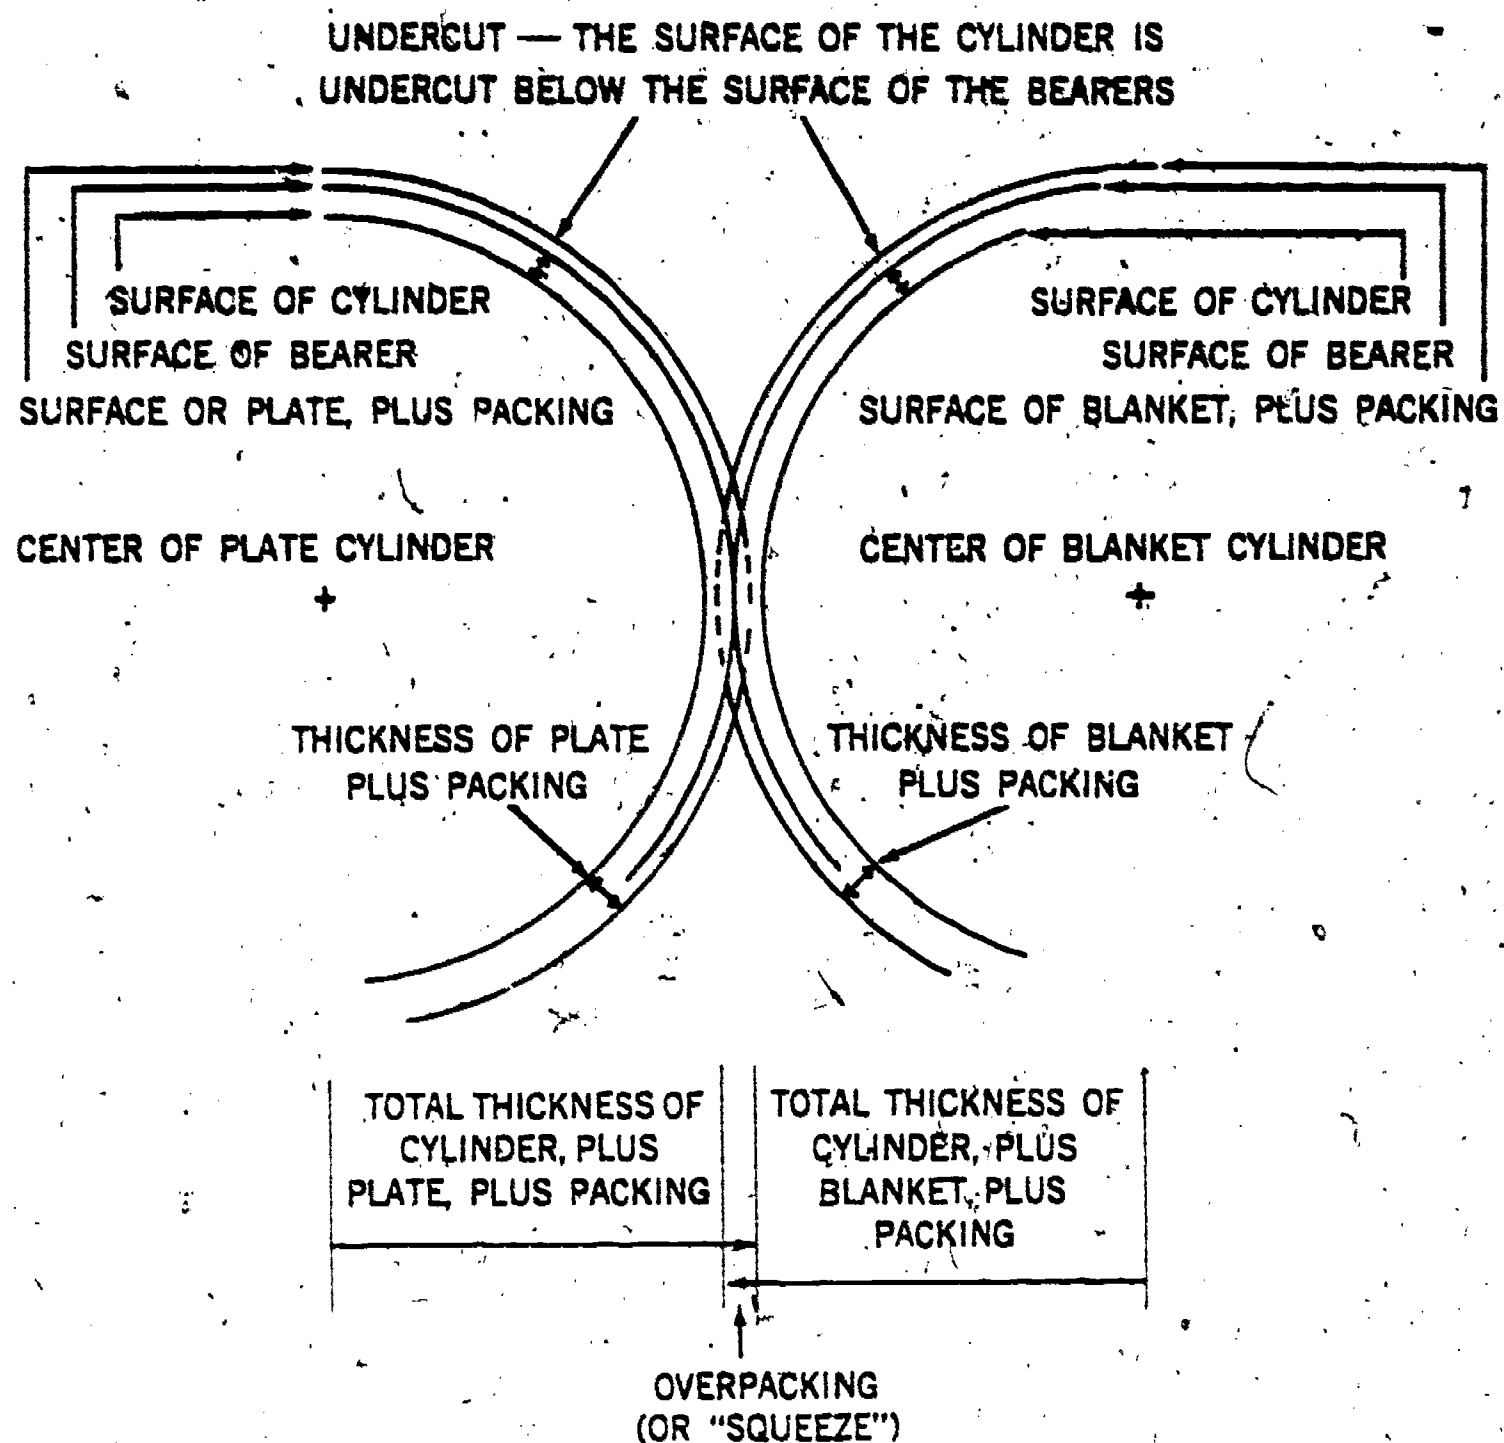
Overpacking plate cylinder and blanket cylinder.
